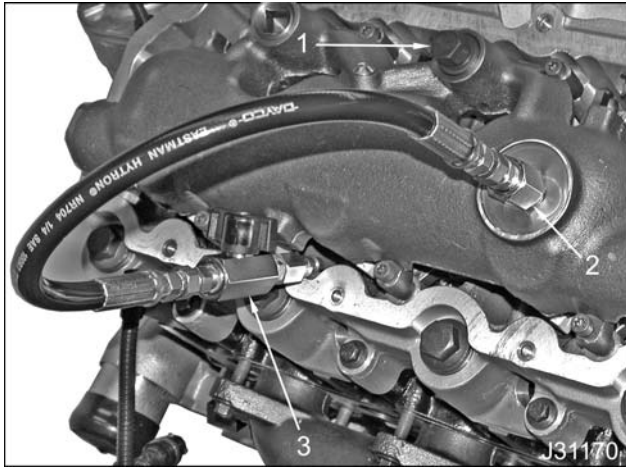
ICP Leak Test Plug and ICP System Test Adapter (left cylinder head)
